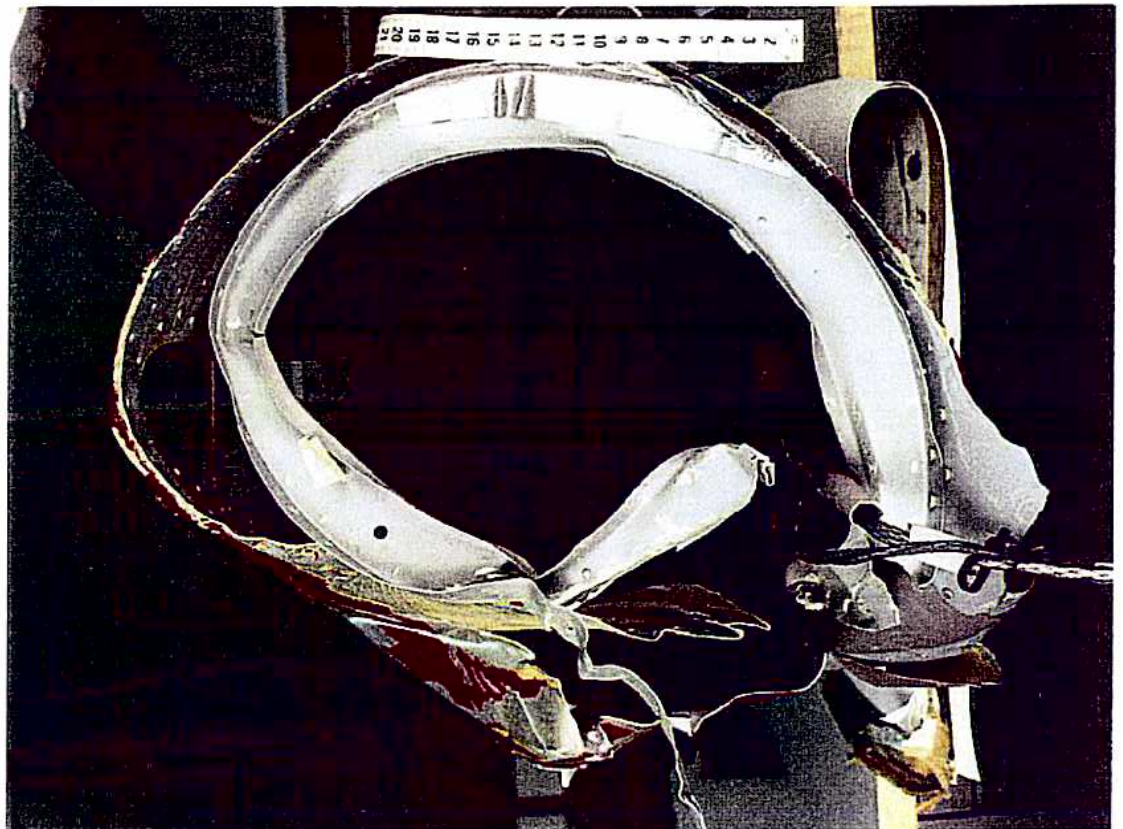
Front view, illustrating the profile deformation of the rear tail boom unit. At this location the R/H side of the tail boom (ref. helicopter axis) has been severely indented just below the leading edge of the horizontal stabilizer.
